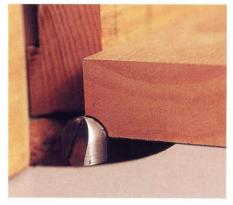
The base molding is a board with a cove cut in its top edge with a round nose or cove bit, and a cap of dentil molding.
